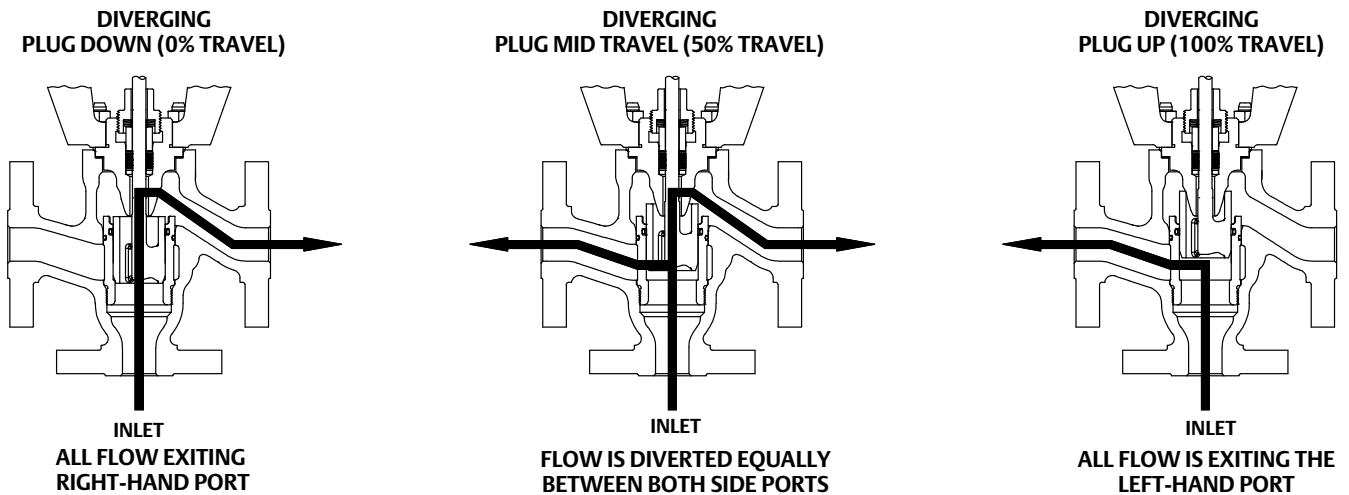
Bottom Port Common Construction Details for Diverging Constructions
